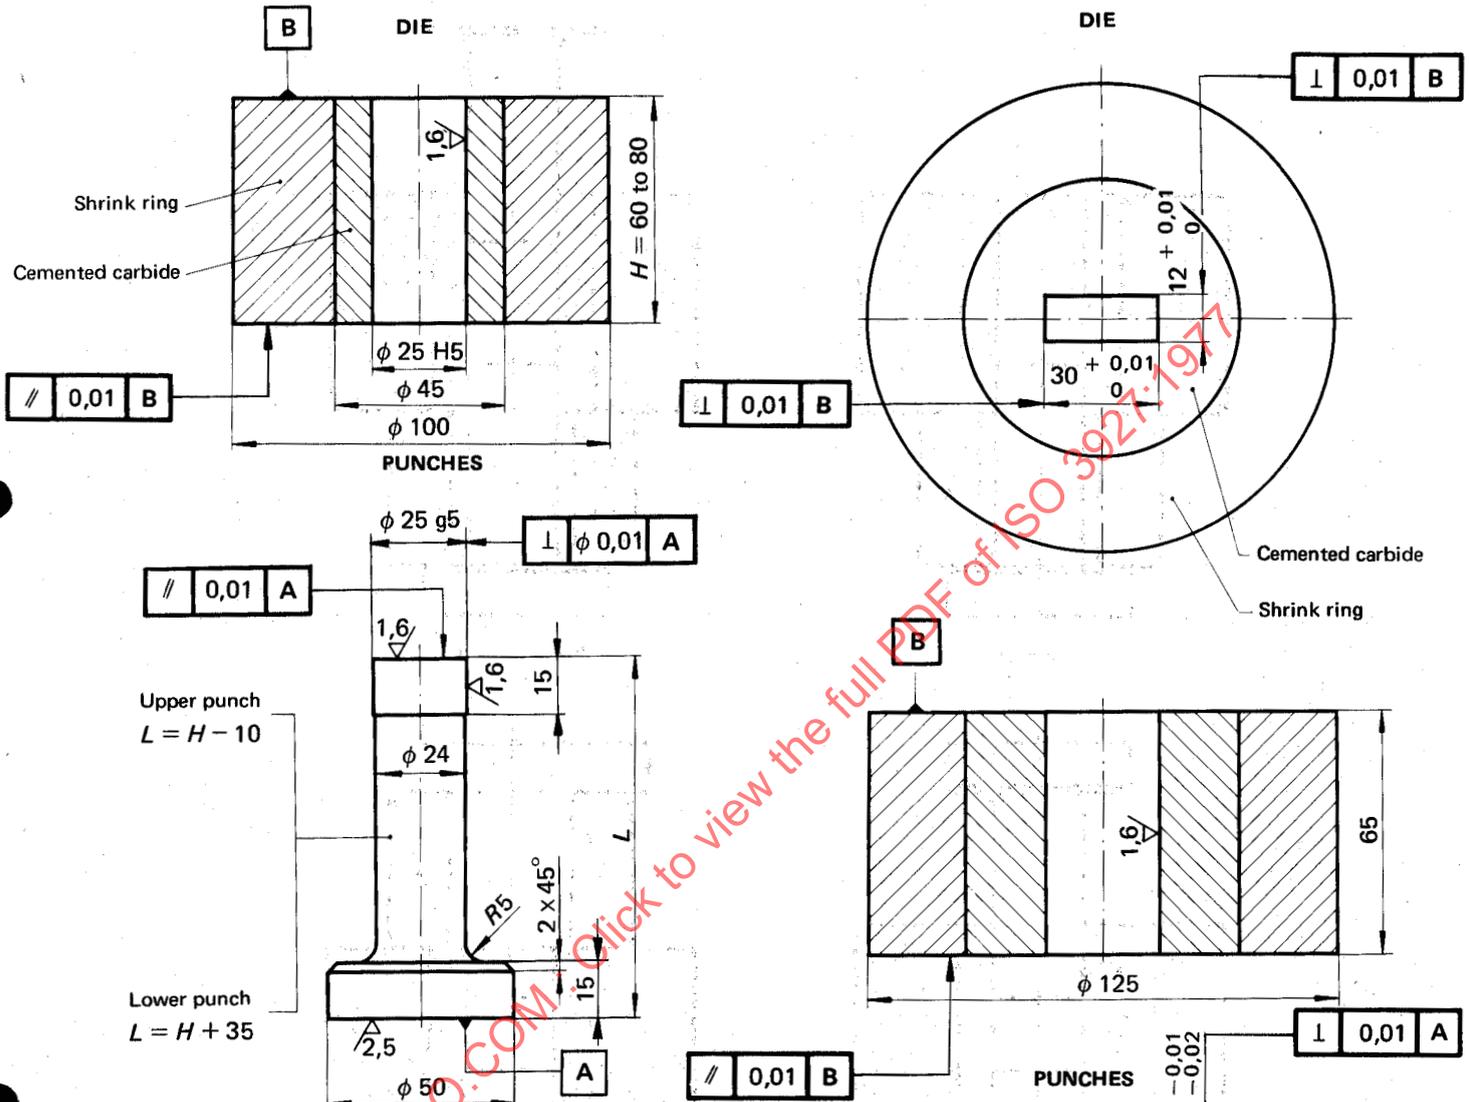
Example of tooling to produce a cylindrical test piece.
